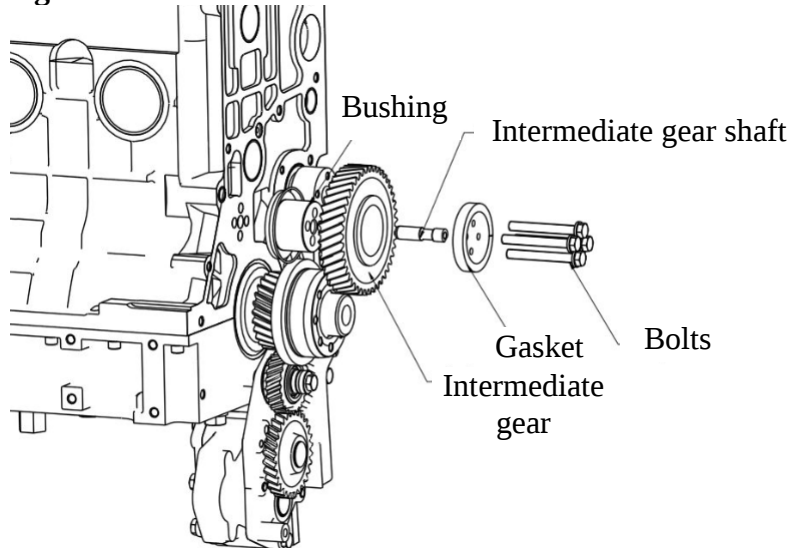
Disassembly Drawing for Intermediate Gear
